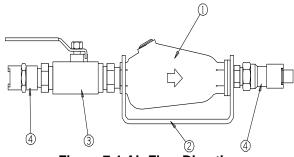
Air Flow Direction 1-Lubricator, 2-Bracket, 3-Ball Valve, Q.D.
